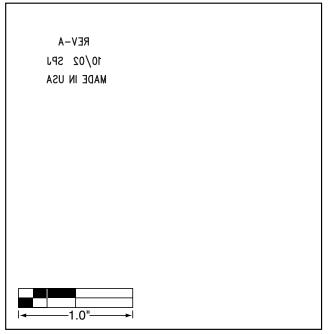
MAX9993 EV Kit PC Board Layout—Bottom Silkscreen
